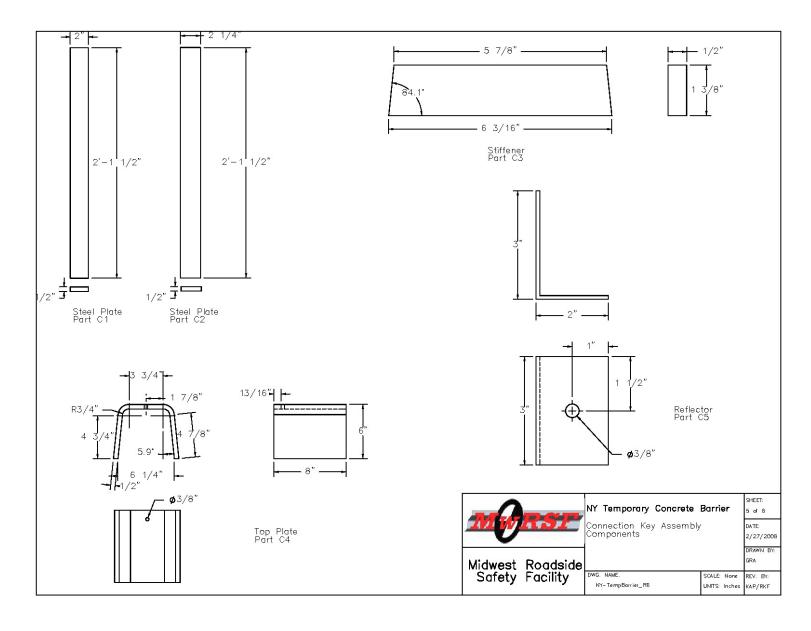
Connection Key Assembly Details (English), Test NYTCB-2
